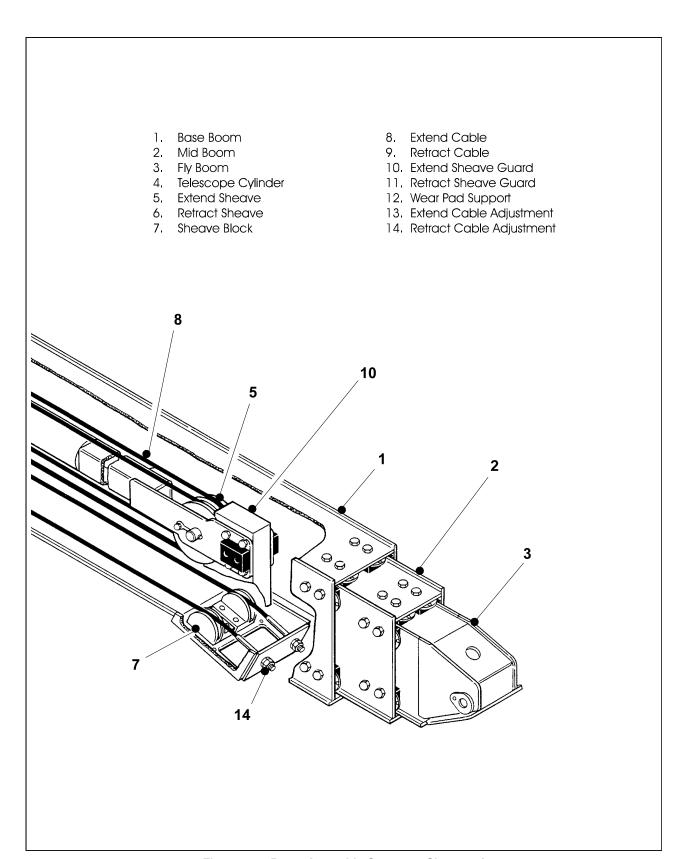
Boom Assembly Cutaway - Sheet 2 of 2
